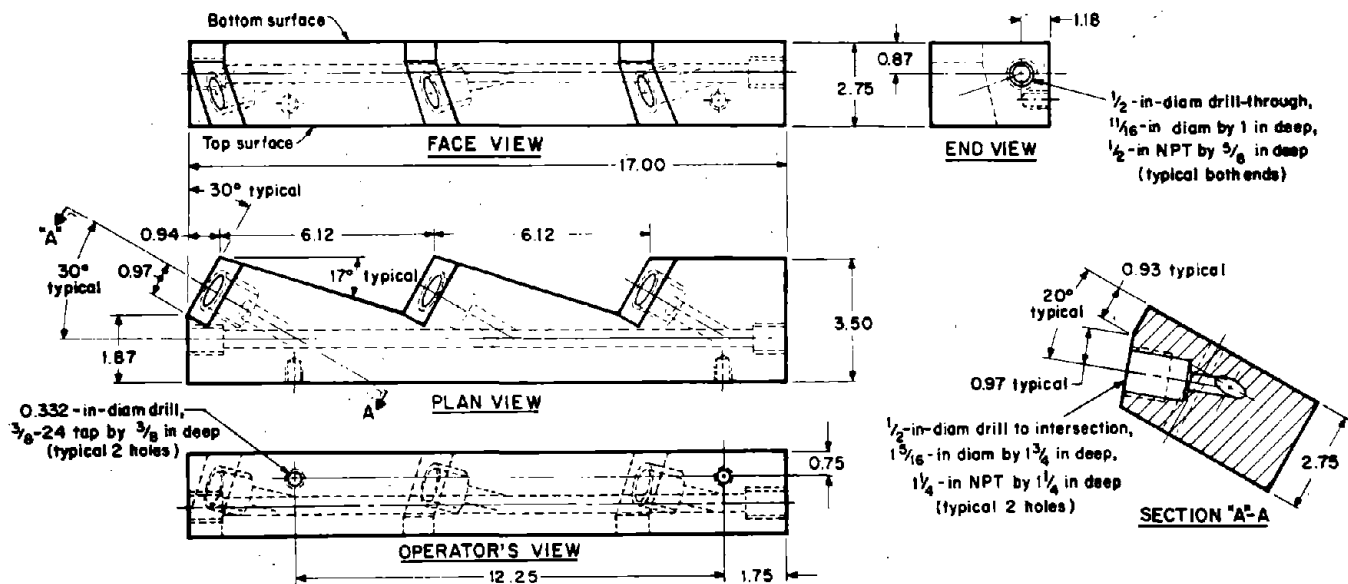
Water spray manifold 5. All dimensions are in inches.
